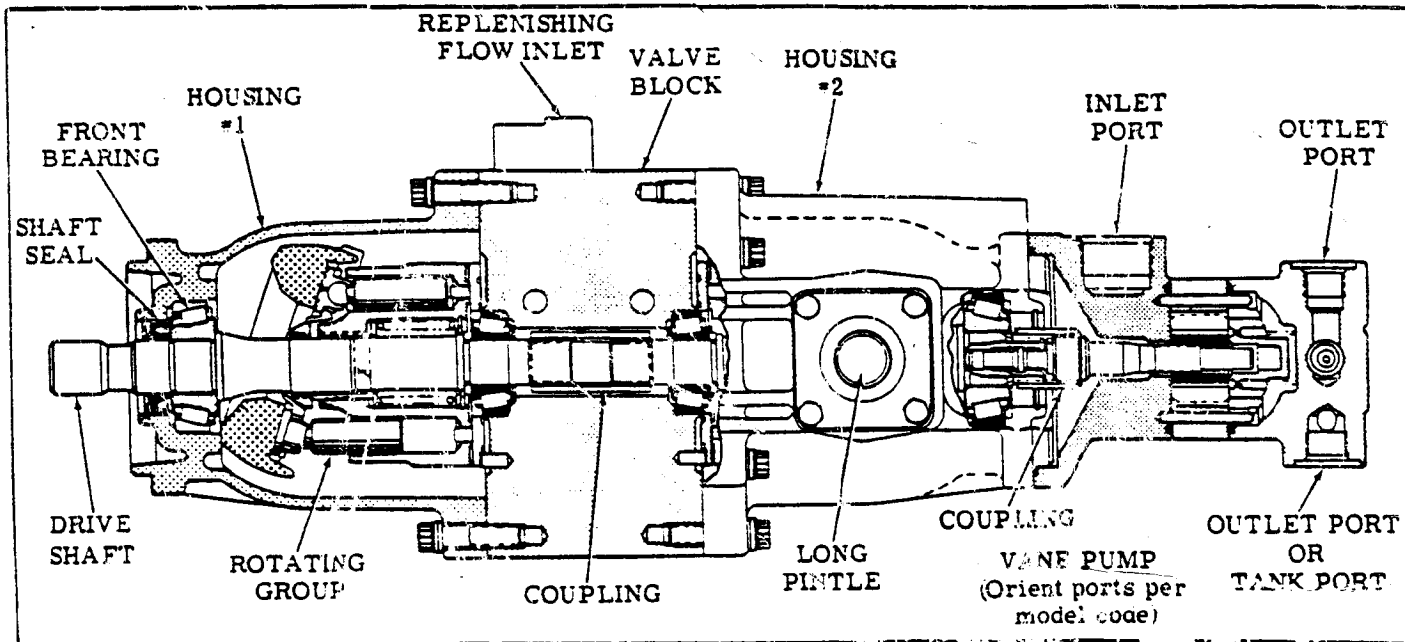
Sectional View of Typical Double Transmission Pump Package.
